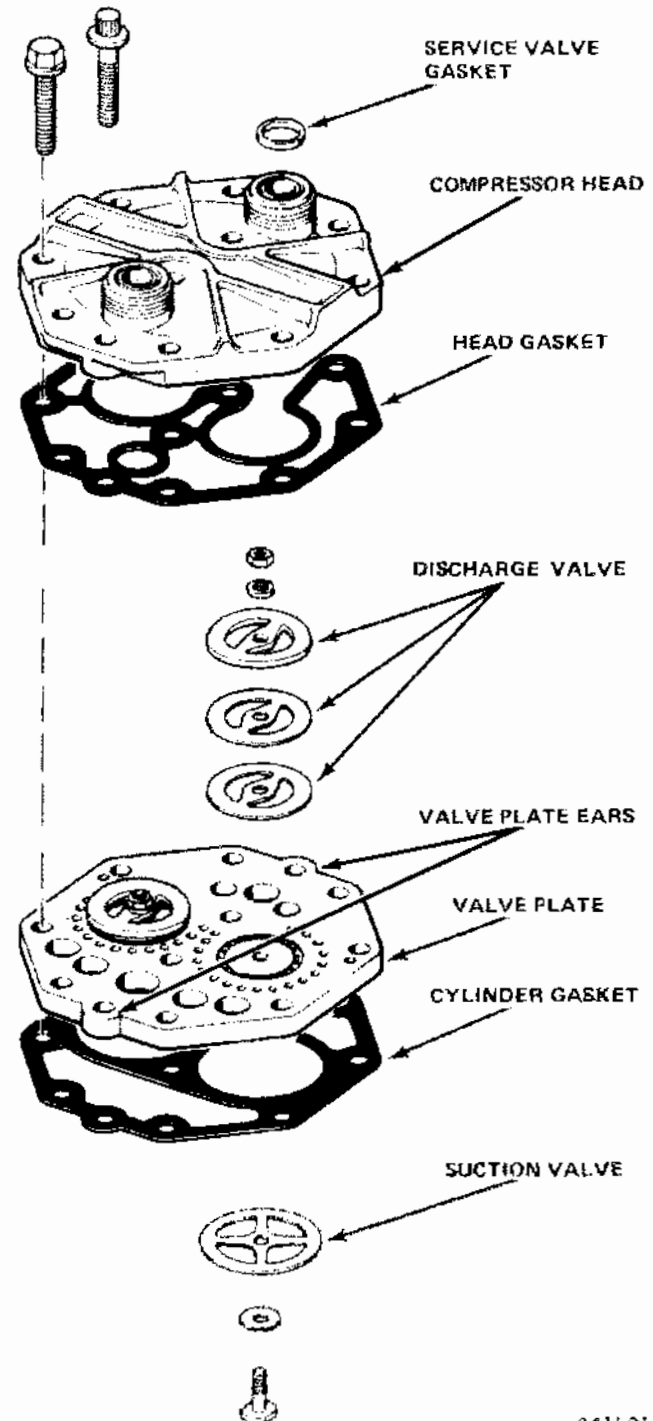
A-13 Head and Valve Plate Assembly Sequence
